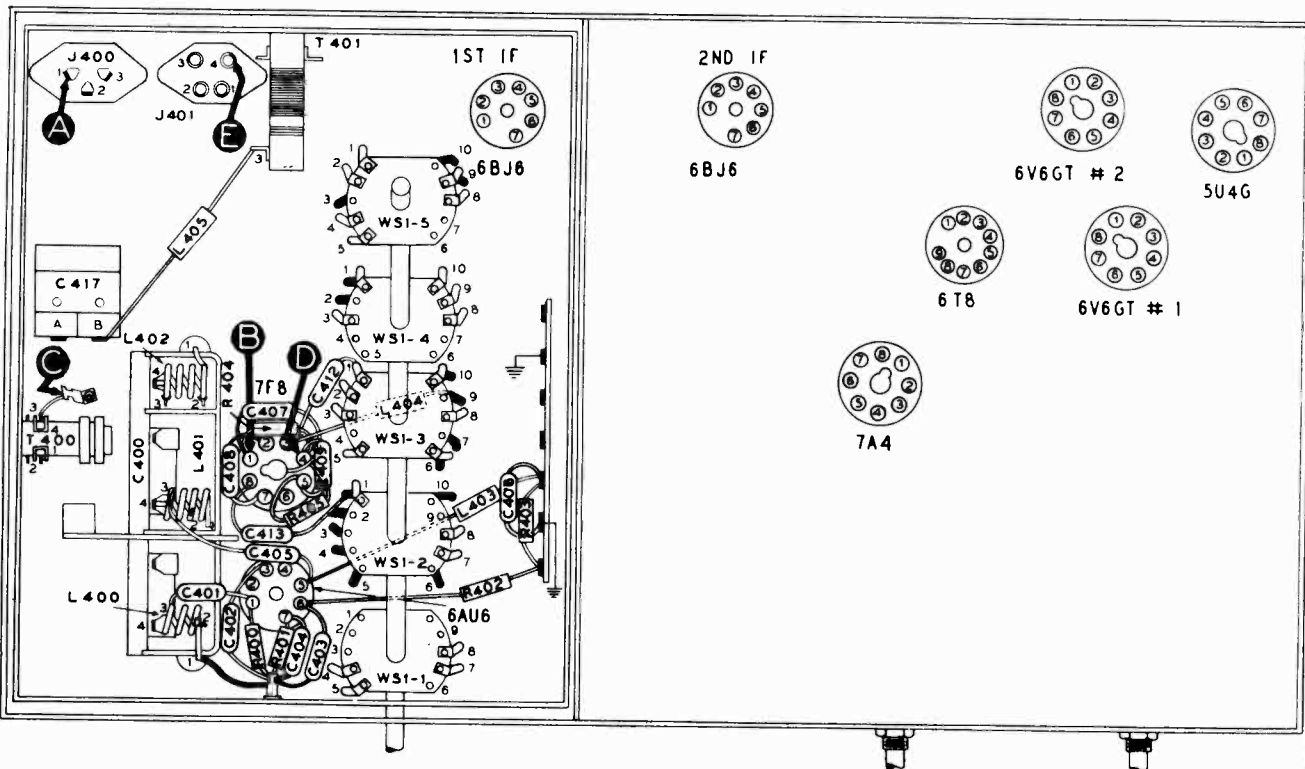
BOTTOM VIEW, SHOWING SECTION 4 TEST POINTS
